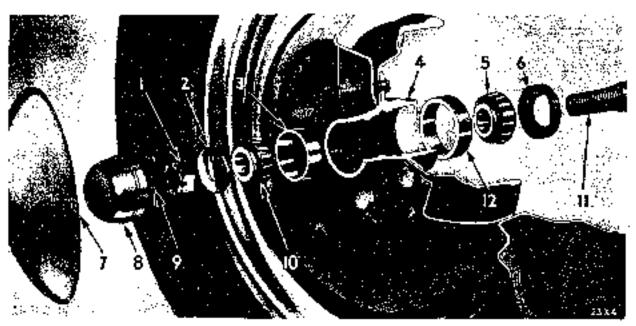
Front Wheel Bearings (Disossembled View) (1986-42 Models)
